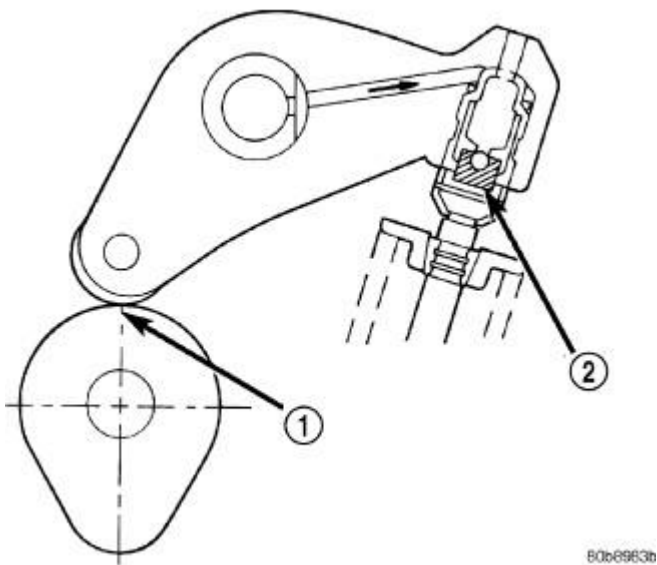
Rocker Arm Positioned On Base Circle Of Camshaft
